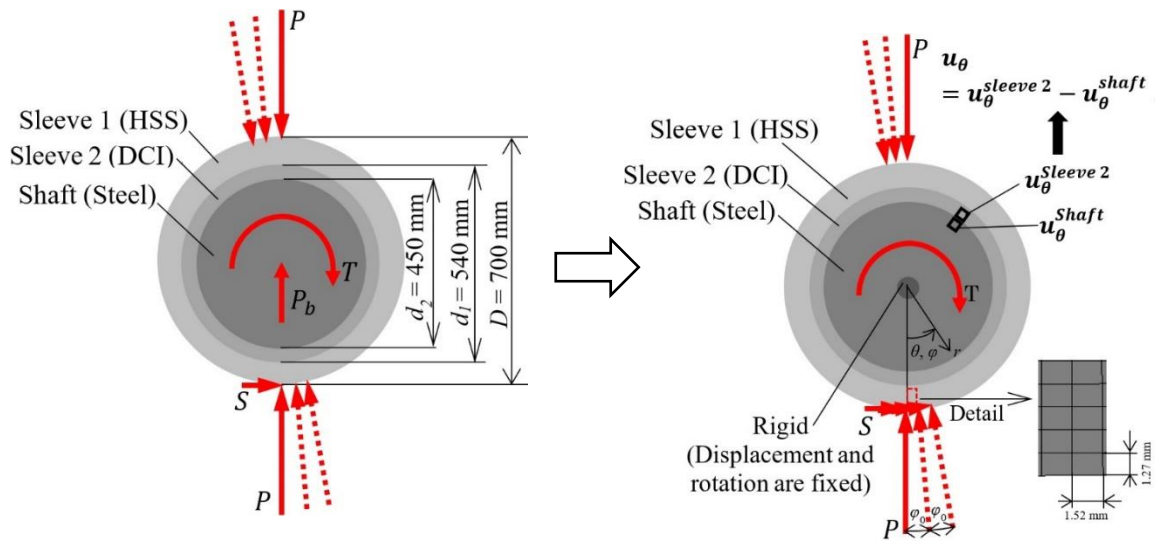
illustrates a sleeve roll considered for the fatigue risk evaluation when it is used in the 4-stage rolling mill. In the sleeve roll
